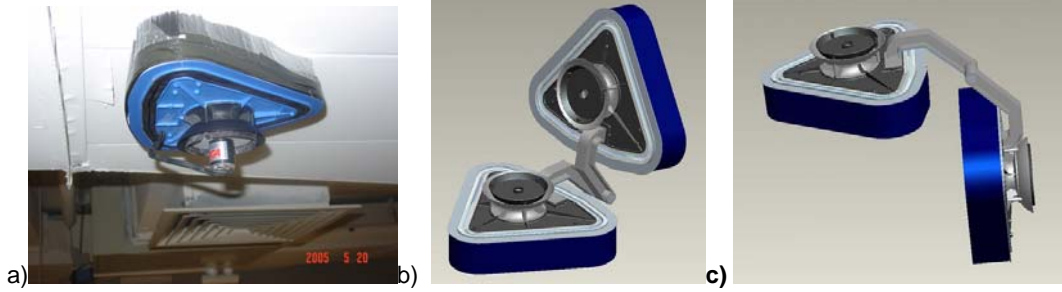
a) The City-Climber prototype-II rests on a ceiling; b) and c) Two climbing robot modules connecting by a hinge in $+90^\circ$, and -90° configurations, being able to make wall-to-wall, and wall-to-ceiling transitions.
